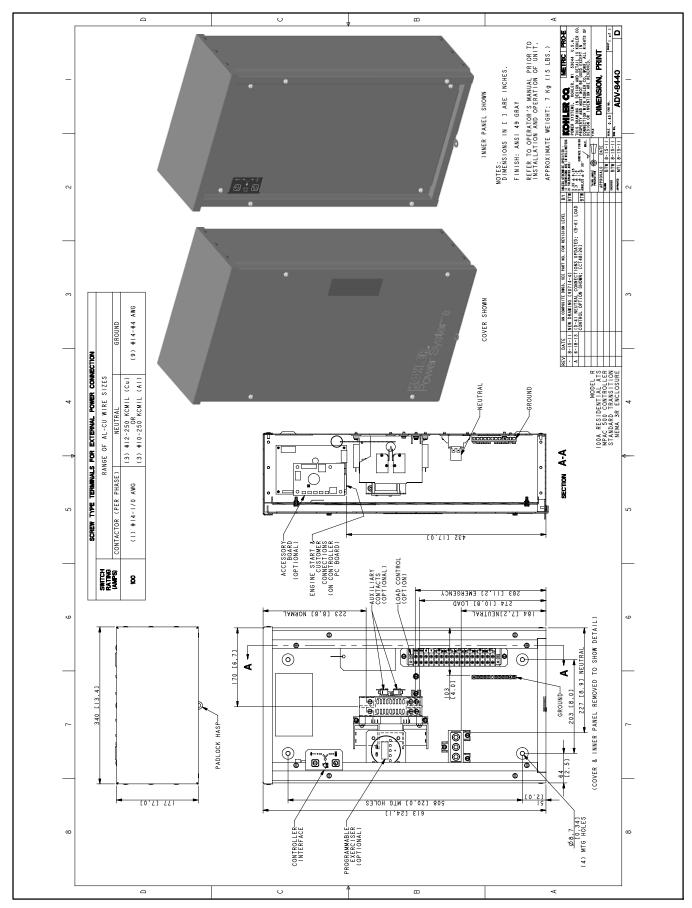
Dimension Drawing, 100 Amp NEMA Type 3R Enclosure without Load Center, ADV-8440
